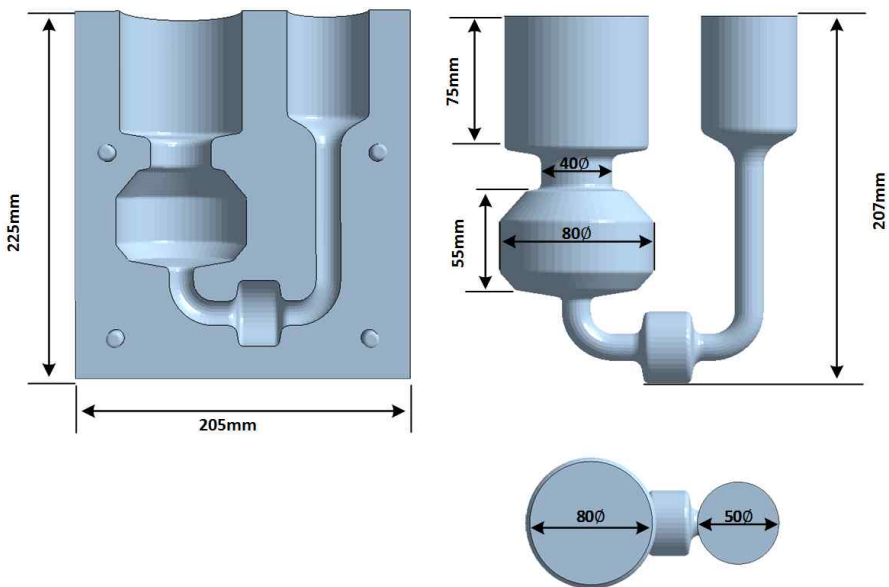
Schematic of (a) mold and (b) the cast product used in this study.
